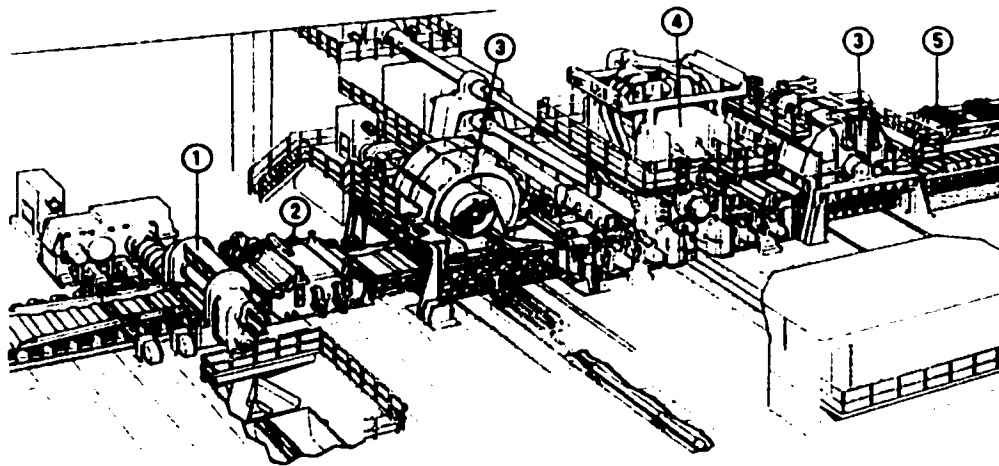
Schematic depicting the typical setup of a Steckel mill; 1. Crop shear and entry side guides; 2. Drum type crop shear; 3. Coiler furnace; 4. 4-high reversing stand; 5. Laminar cooling section [Kramer97].
